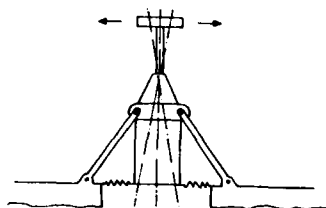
Mounting system: main gear box/rotor shaft and head
